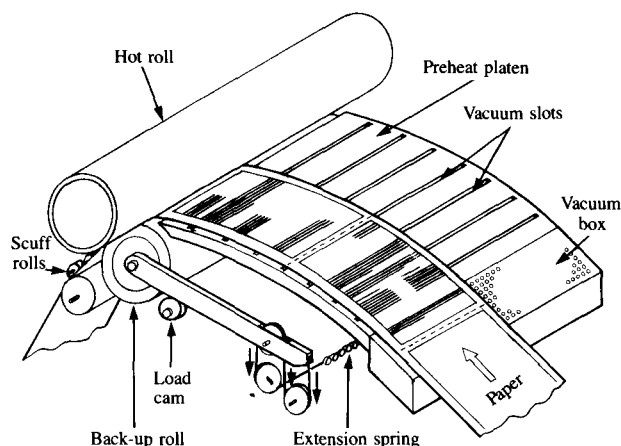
The 3800 fuser assembly. (From [2], reproduced with permission.)
